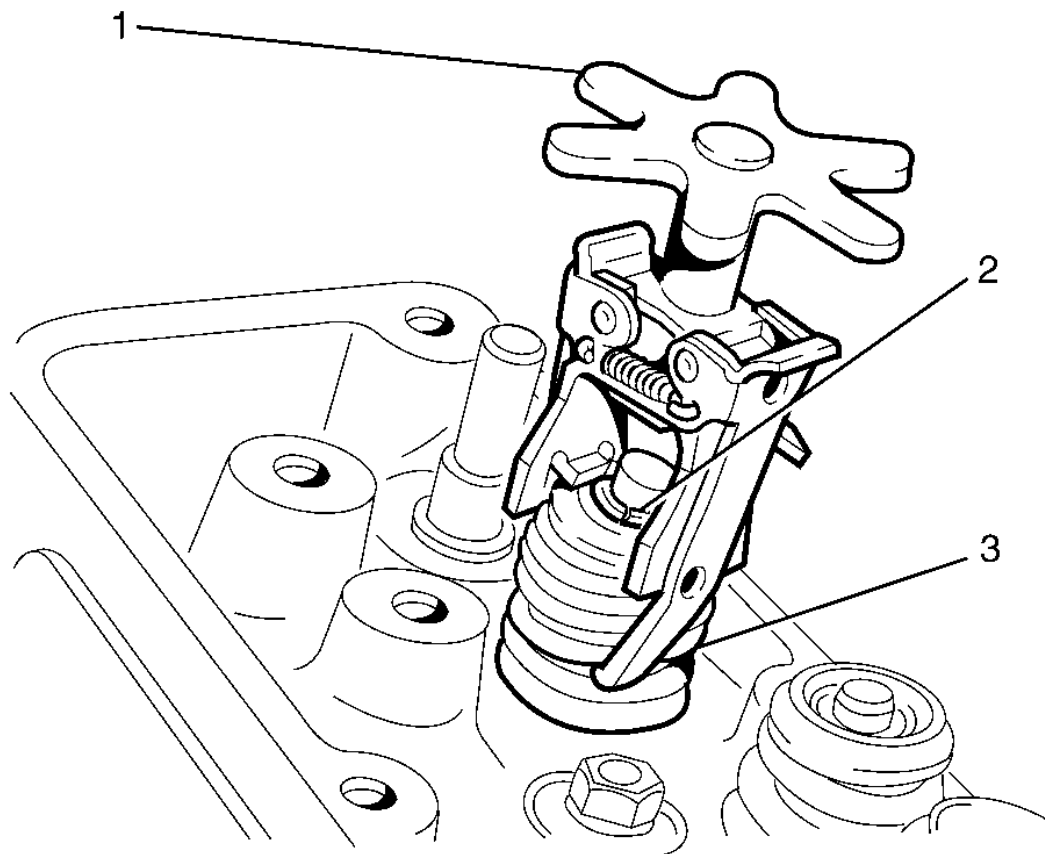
Locating J 38606, Valve Spring Retaining Cap Collets & Valve Spring
